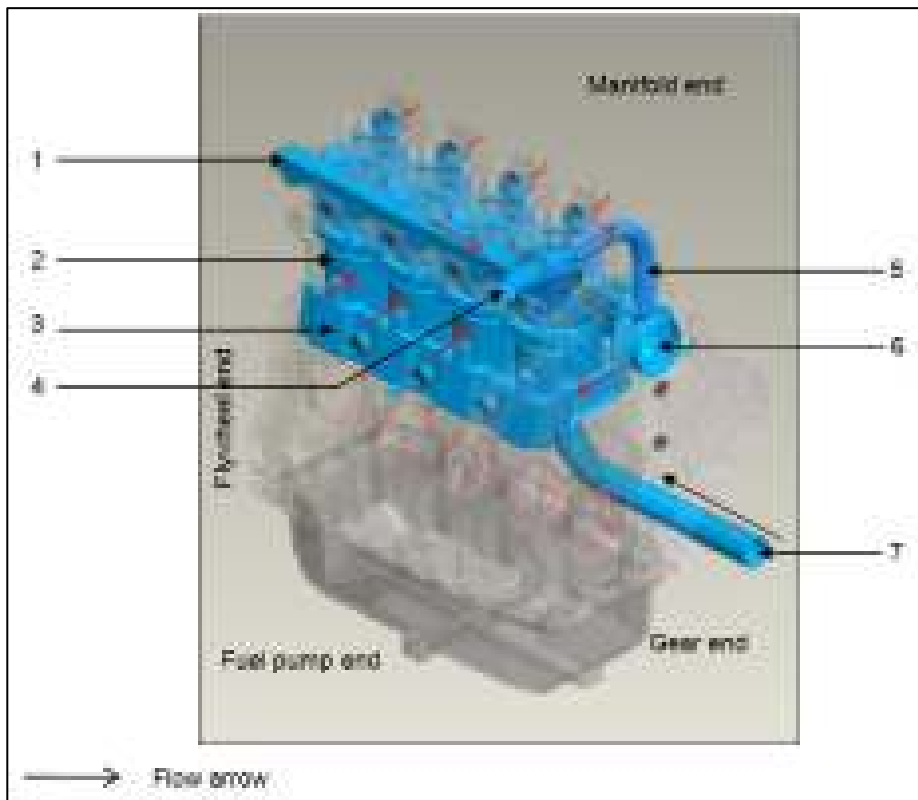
Illustration of G-Series Cooling System FIP Side
